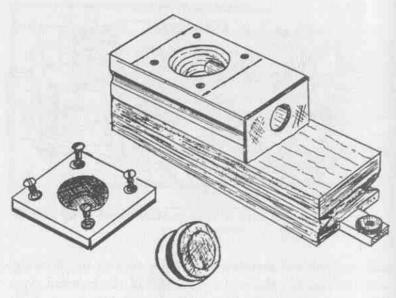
A Unit Containing the Valve, Pouch, Bleed, and Pneumatic, with Valve Taken Out
